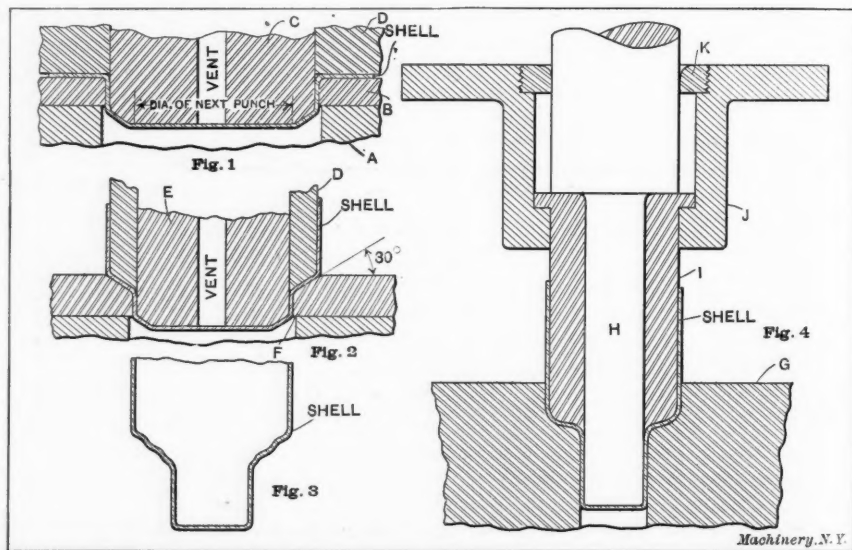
First Drawing Die. Fig. 2. Re-drawing Die. Fig. 3. Shape of the Shell after reducing the Shoulder. Fig. 4. Punch and Die for Finish Drawing the Shell
